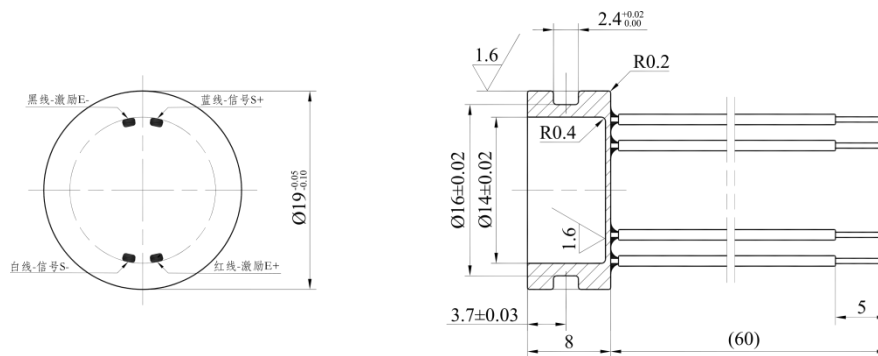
Dimension of gauge pressure and lead definition (Side seal)
